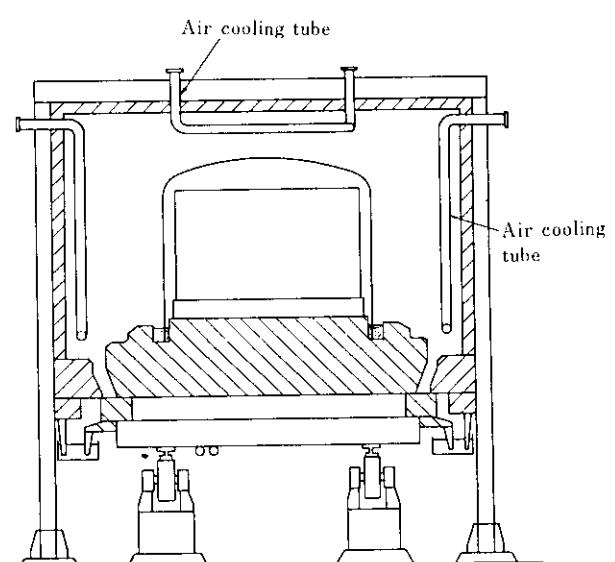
Sectional view of No.2 cooling zone of KSR furnace
